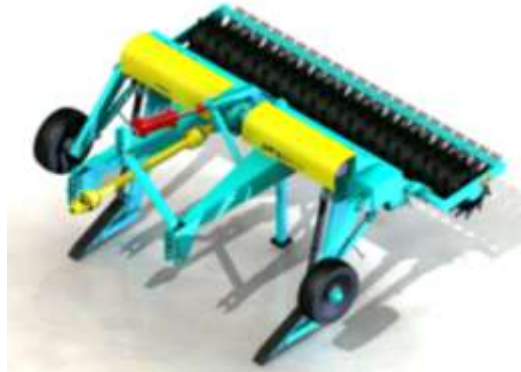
Technical equipment with active parts driven for deeply loosening the soil /
